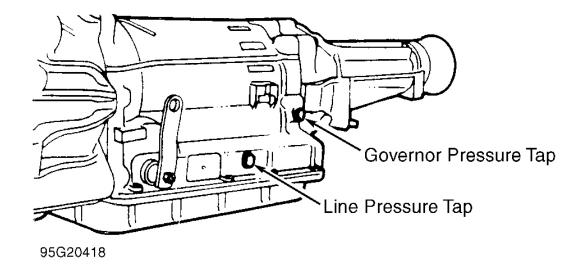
Identifying Pressure Taps Courtesy of ISUZU MOTOR CO.
